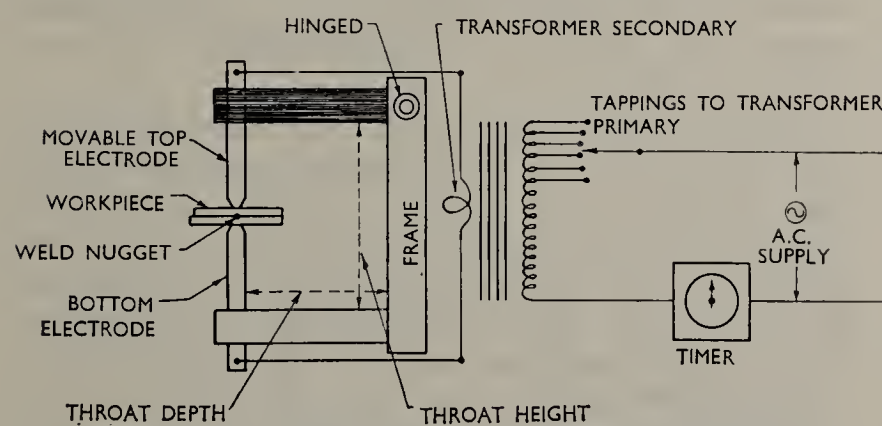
Diagram of a basic spot welding machine.
